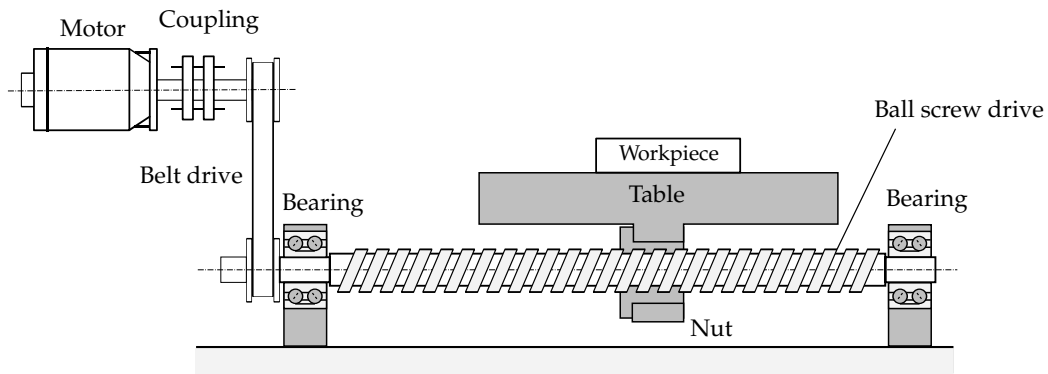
Schematic configuration of a typical machine tool ball screw feed drive
